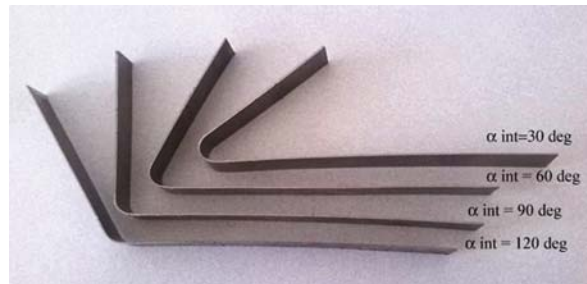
Circular bending at different angles, material thickness 1.2, punch radius 5 mm
